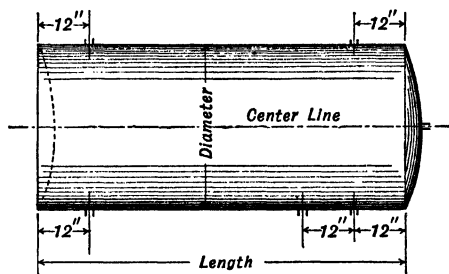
Standard Location of Openings for Hot Water Storage Tanks.
